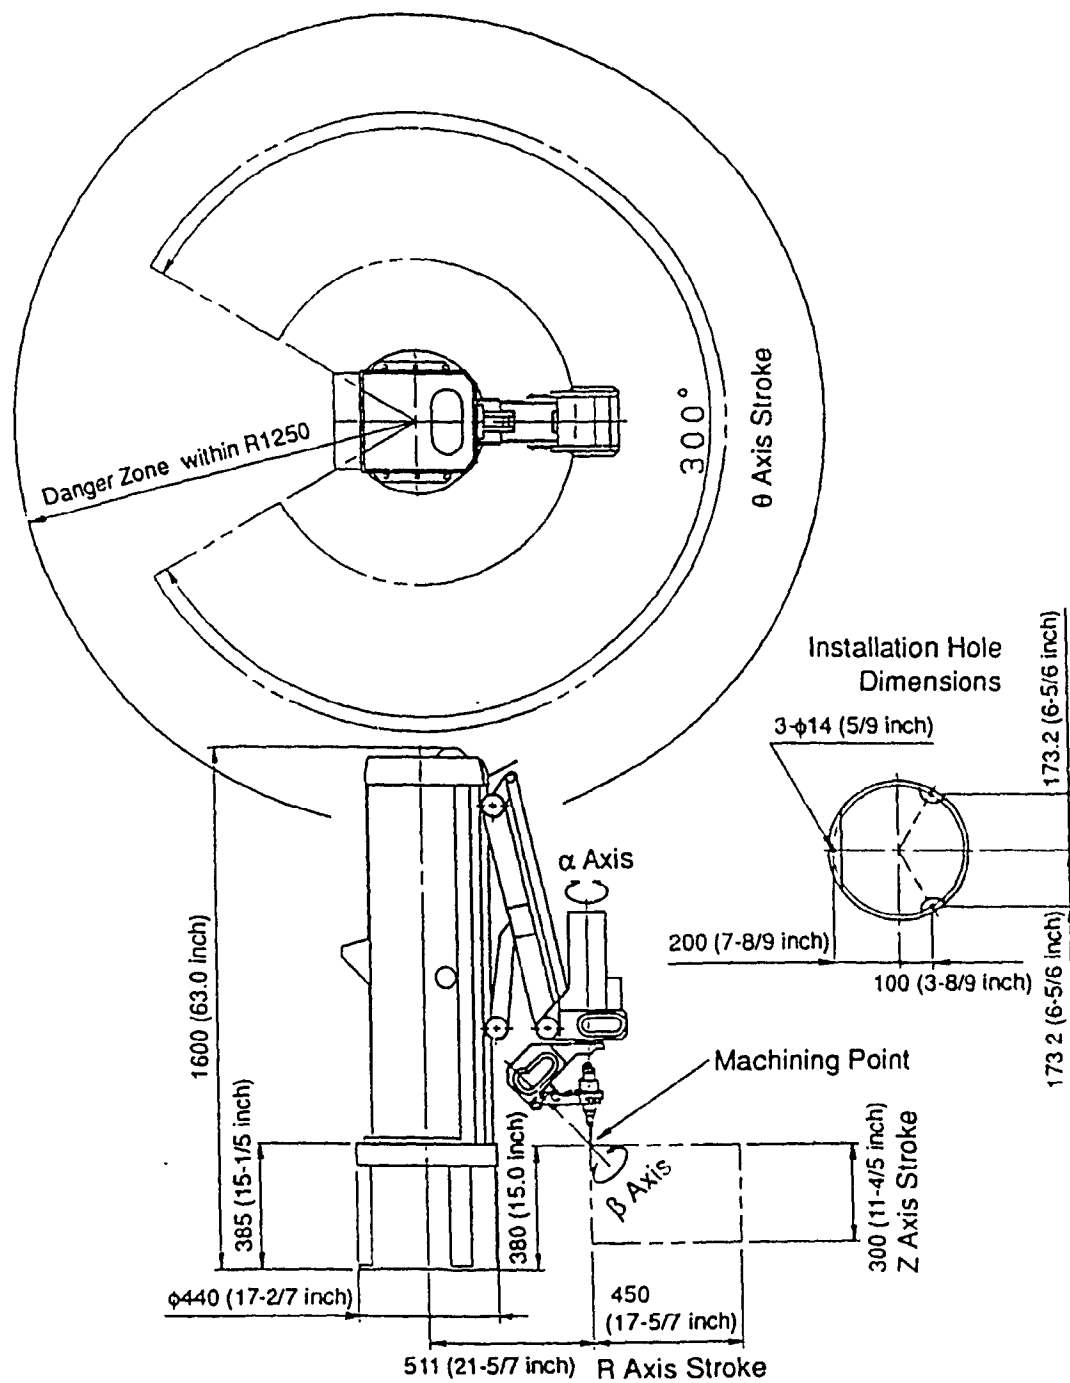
Schematic of Yamaha Zeta-1 Deburring Robot [11] (with machining point and tool axis shown)
